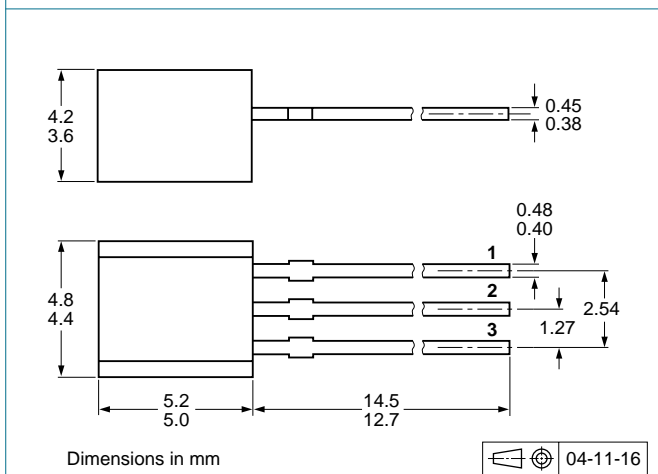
Package outline SOT54 (SC-43A/TO-92)
